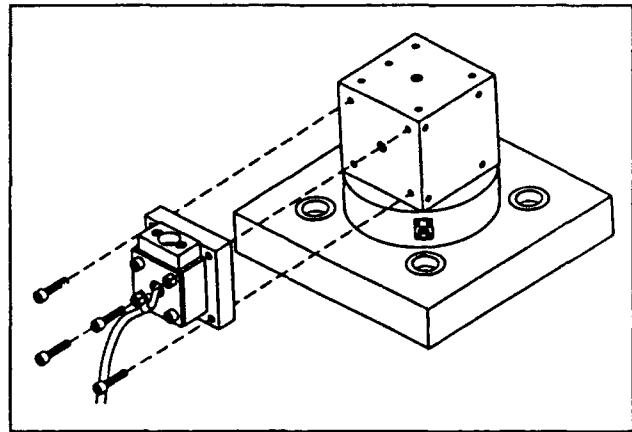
Vibration test fixture. The fixture shown is for a TO-8 size crystal unit.
